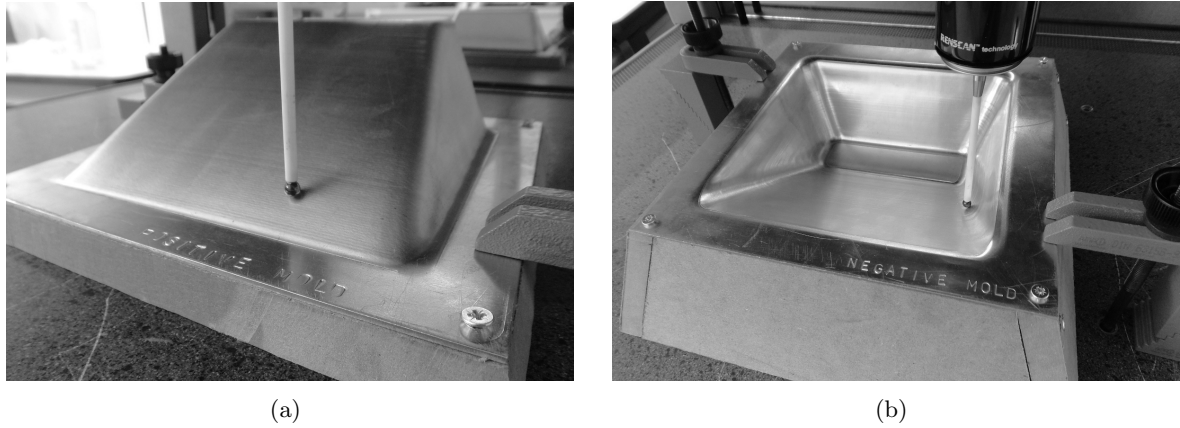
Sheet metal thermoforming moulds dimensional measurement: (a) positive (b) negative
